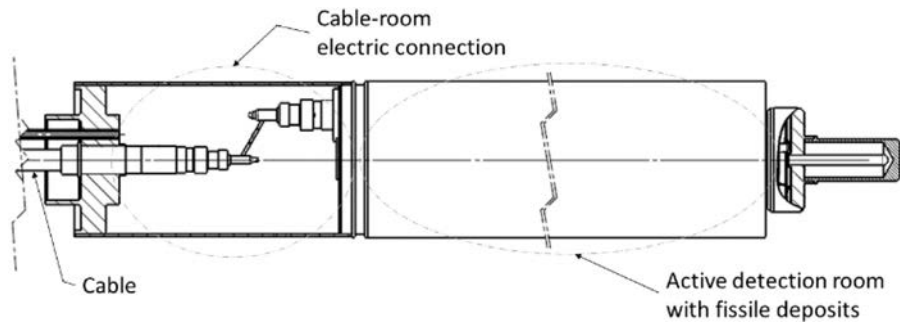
Drawings of HTFC manufactured by PHOTONIS and used in this work.
